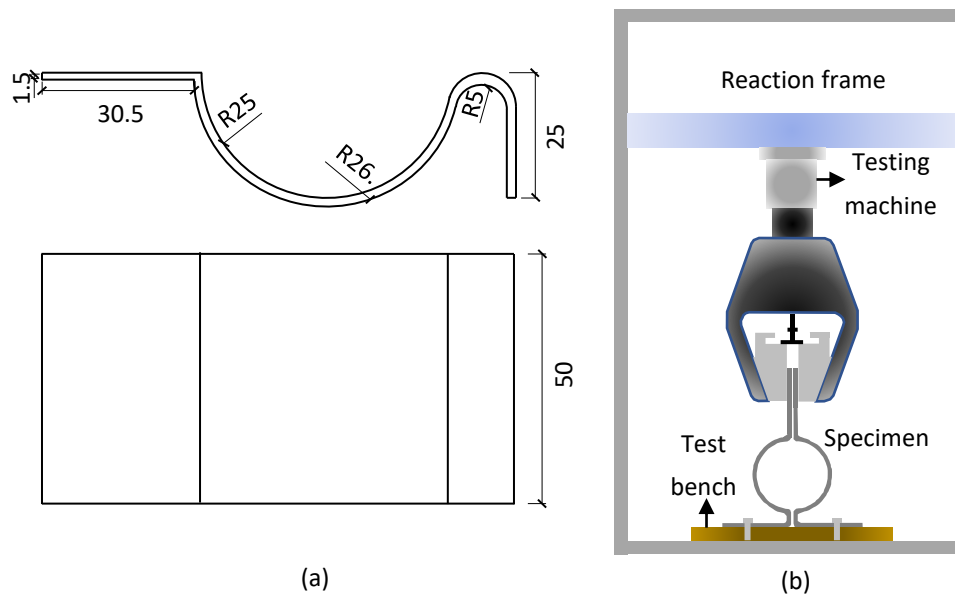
Test setup and specimen dimensions; (a) Dimensions of the ambient-temperature test specimens, (b) Test setup.
